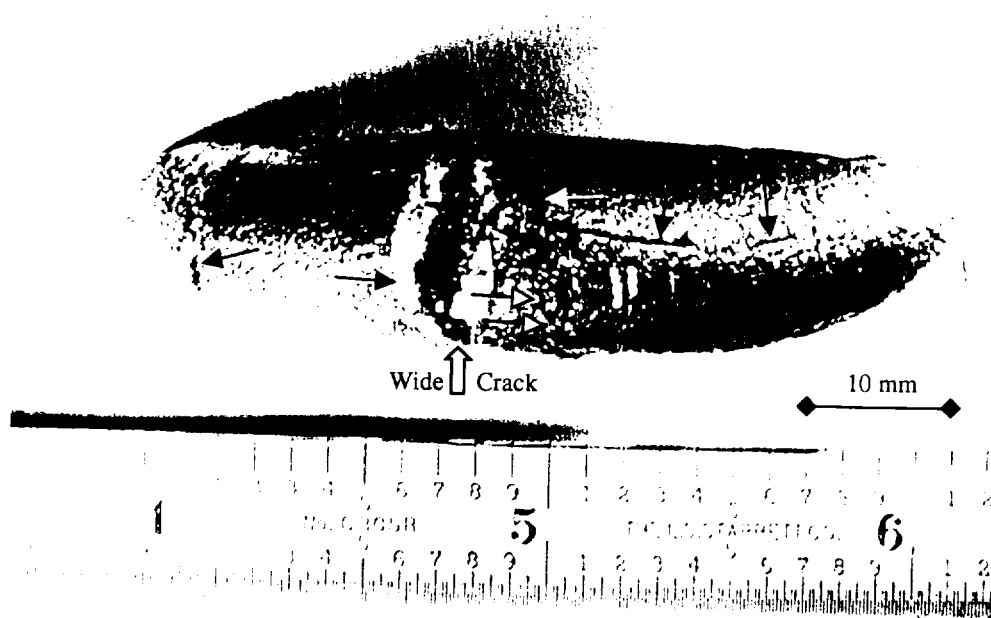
(a) Surface Appearance of Boat EDM Face Showing the Presence of Axial and Transverse Cracks (Arrows) Note that the long axis of the boat is oriented parallel to the Alloy 182 butter/stainless steel cladding interface
